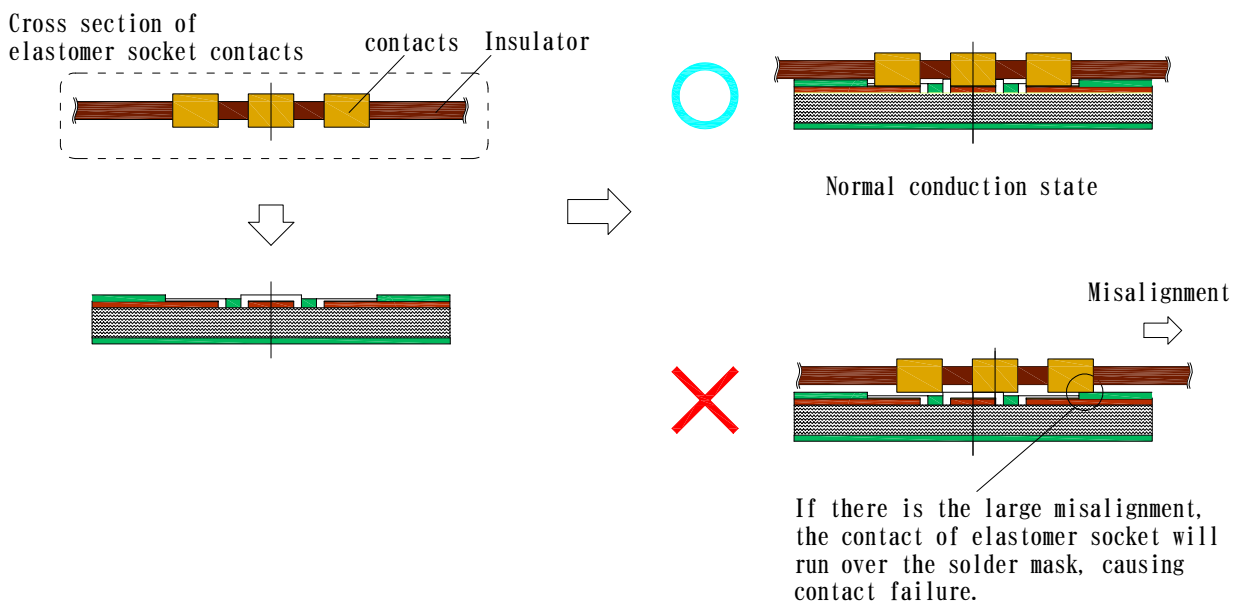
shows the cross section of PCB in Figure 1 and contacts of elastomer socket.
